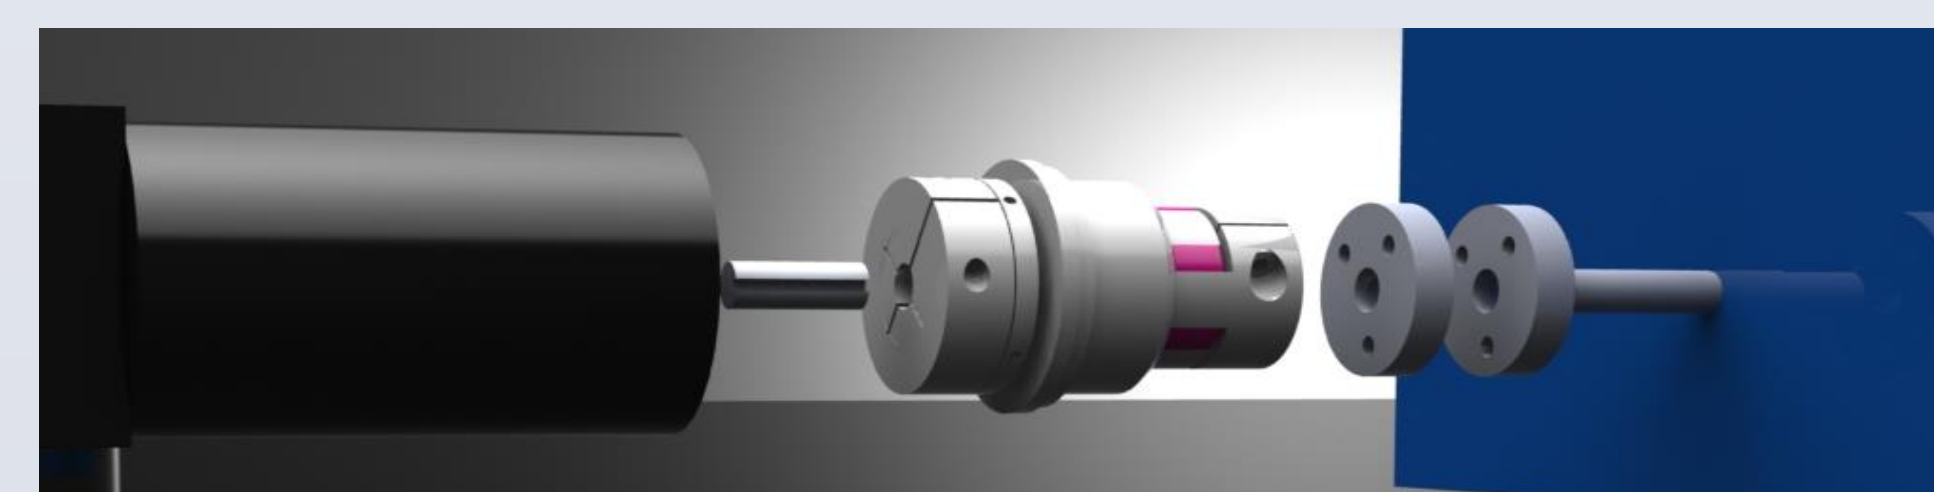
Spider Coupling with Torque Limiter and the Custom Spacer Design Assembly
